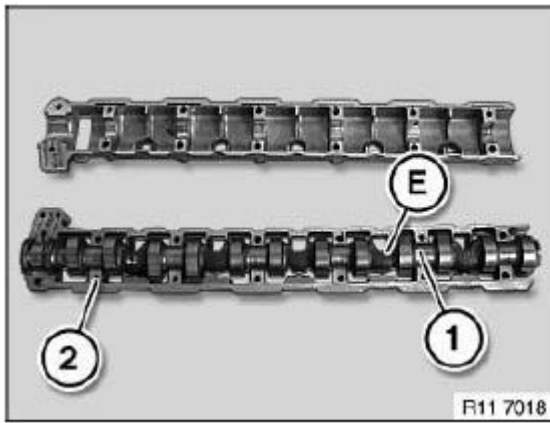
Lay Inlet Camshaft (1) In Bearing Strip
